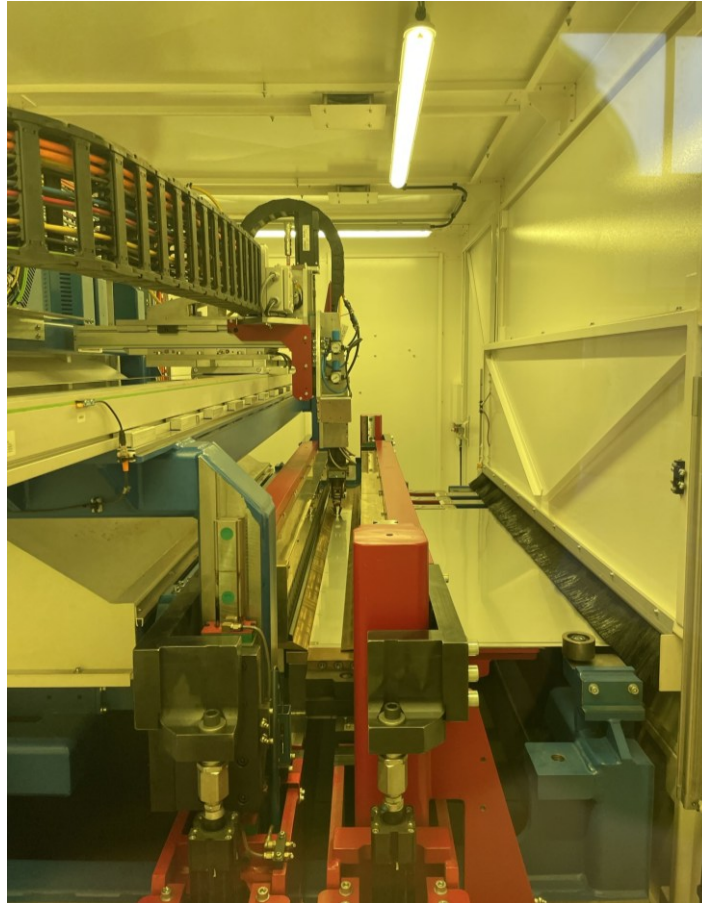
Inside view of the Welding Machine (Rodomach), on the left the electrical actuators, in red the clamping beams to avoid space and slippage between the metal sheets, and transport them after the welding area is completed; in far view, there is the welding head, with the coaxial fiber 3kW laser employed for industrial production
